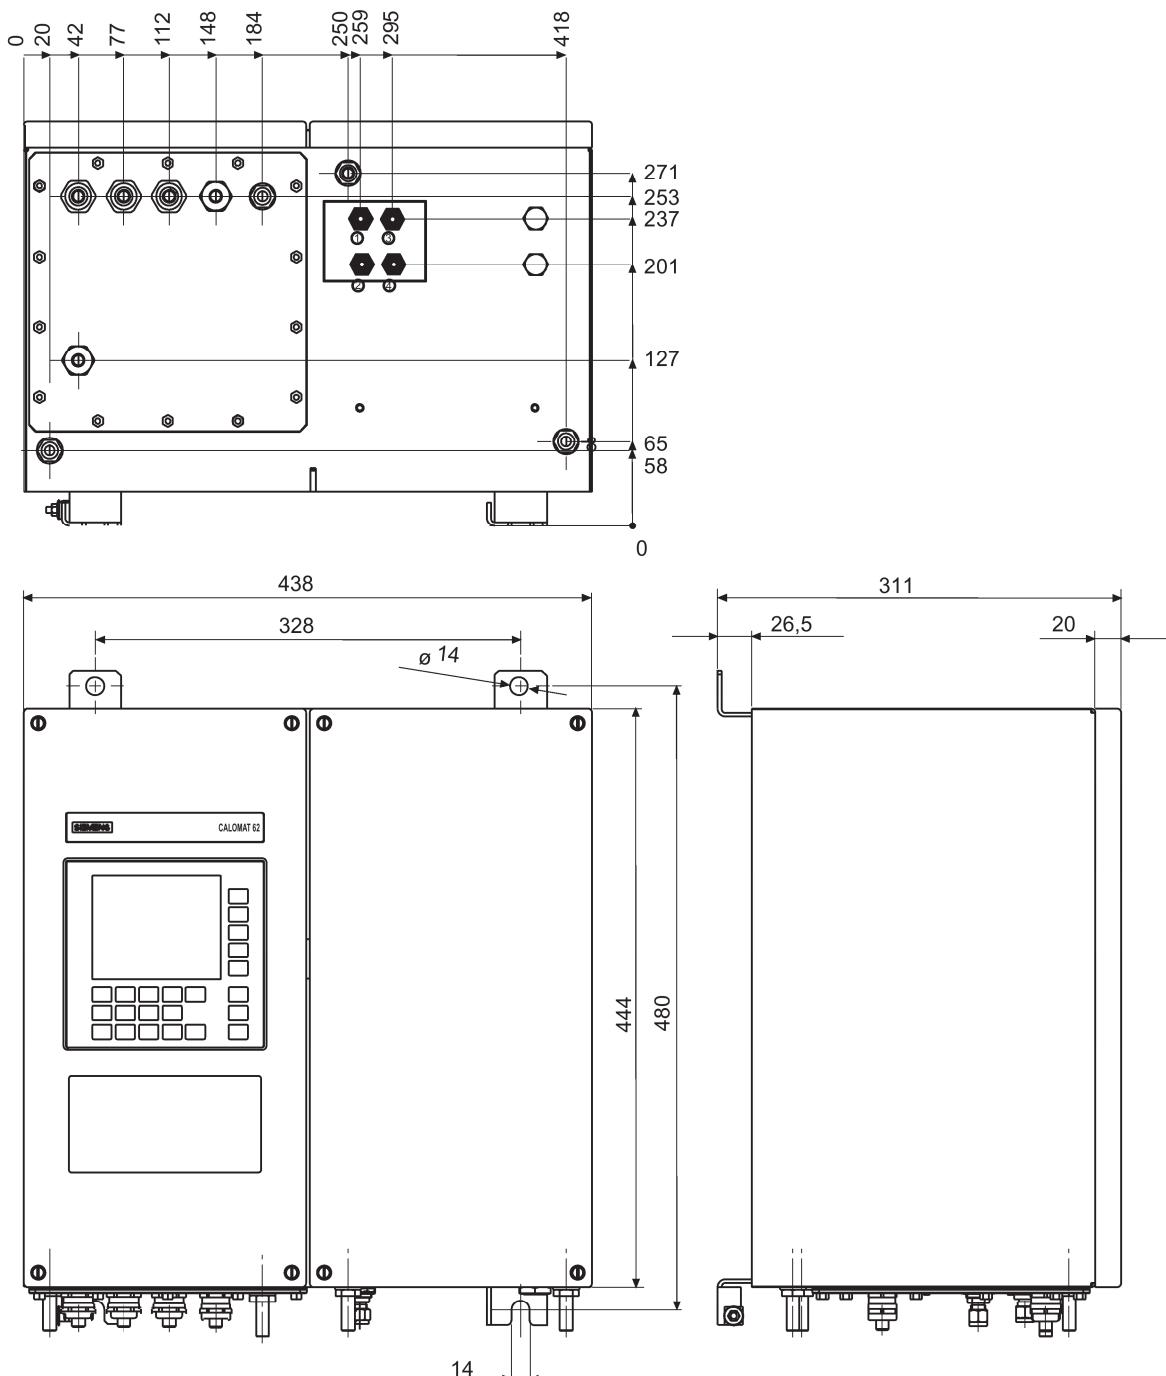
Dimensional drawing of CALOMAT 62F field device
